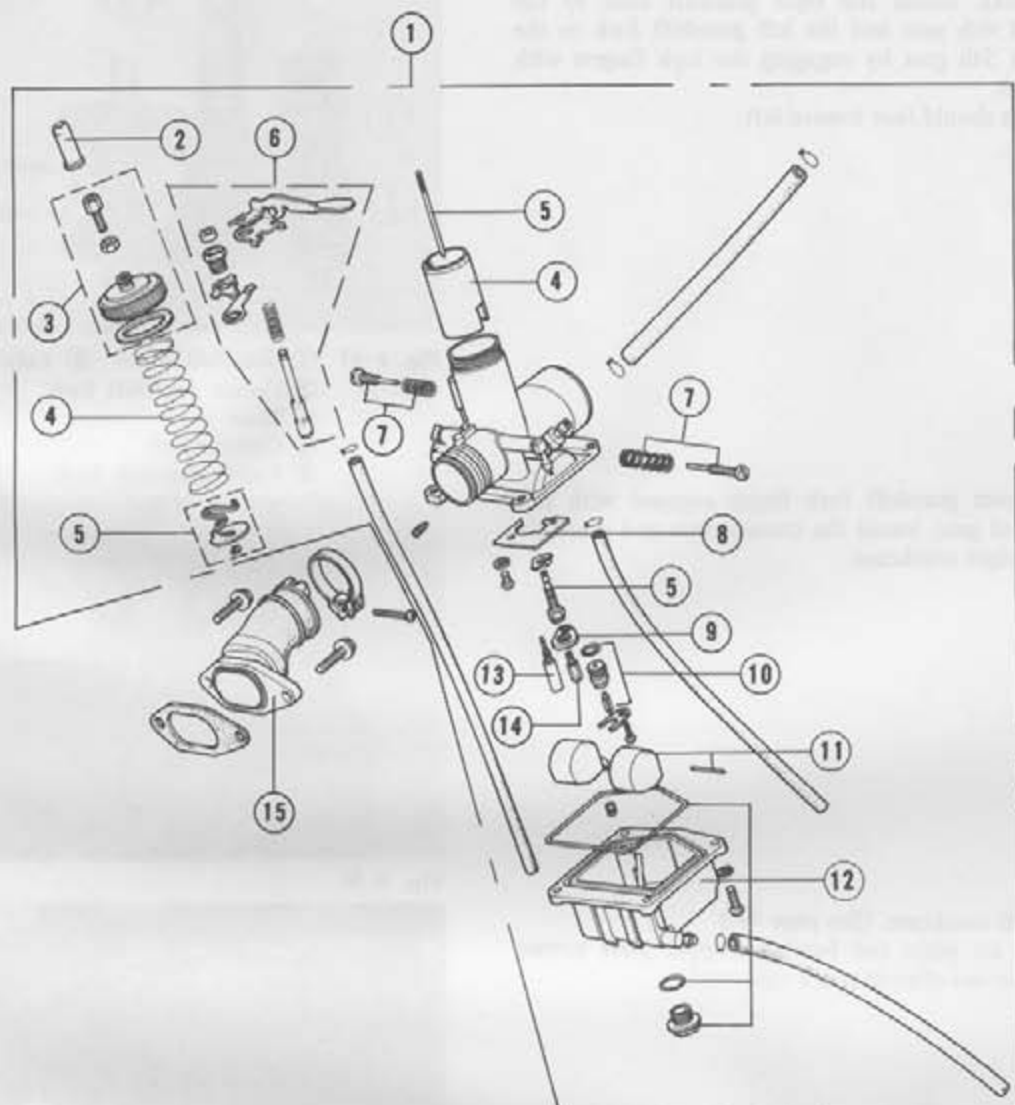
① Carburetor assy. ⑨ Jet holder
